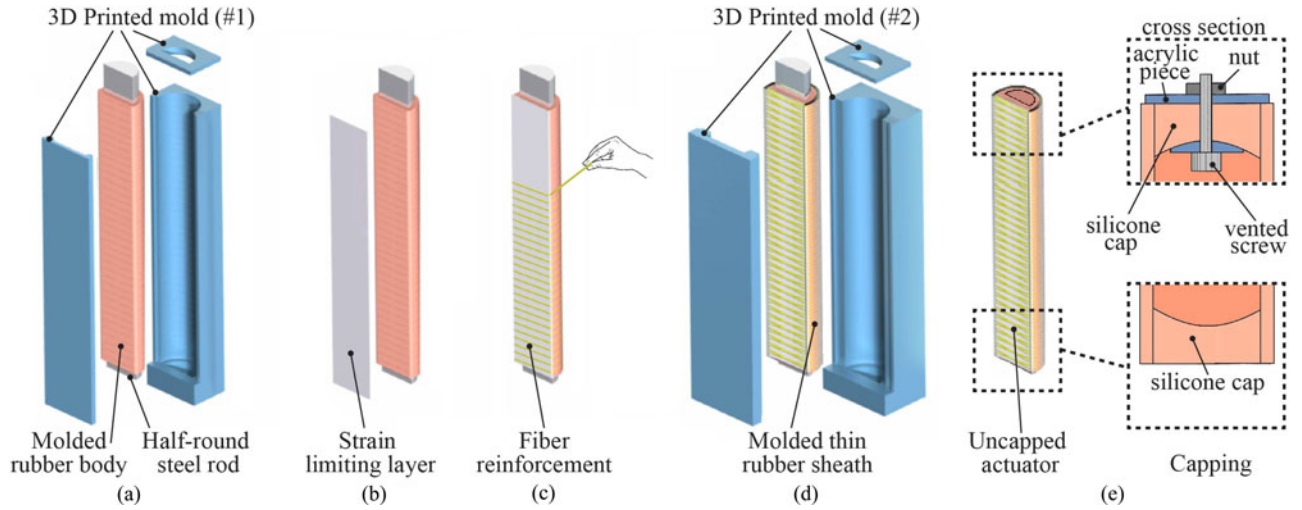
Schematic outlining some stages of the soft fiber-reinforced bending actuator fabrication process. (a) First molding step using a 3-D printed part. (b) Strain limiting layer (woven fiberglass) is attached to the flat face of the actuator. (c) Thread (Kevlar fiber) is then wound along the entire length of the actuator. (d) Second molding step: the entire actuator is encapsulated in a layer of silicone to anchor all fiber reinforcements. (e) In the final step, the half-round steel rod is removed and both ends of the actuator are capped allowing one end to have a port for the inflow/outflow of air.
